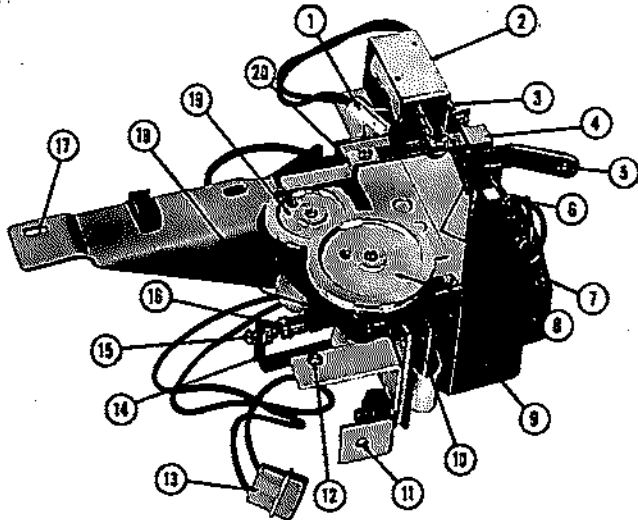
TURNTABLE MOTOR ADJUSTMENTS
